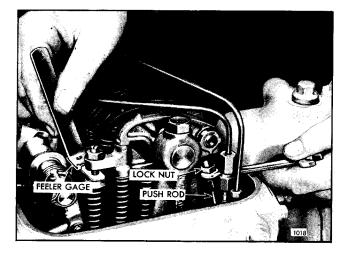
Adjusting Valve Clearance (Spring–Loaded Valve Bridge)
